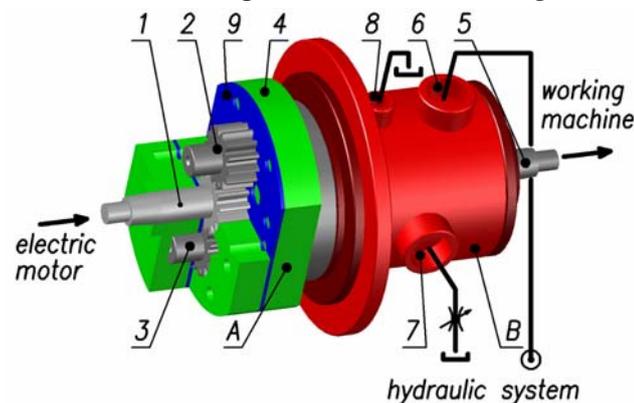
Design and operation principle of the multifunctional fluid power machine: A – gear unit, B – rotating distributor, 1,2,3 – gears; 4 – body of the machine, 5 – neck of the distributor’s shaft, 6,7,8 – connection ports, 9 – compensation pad
